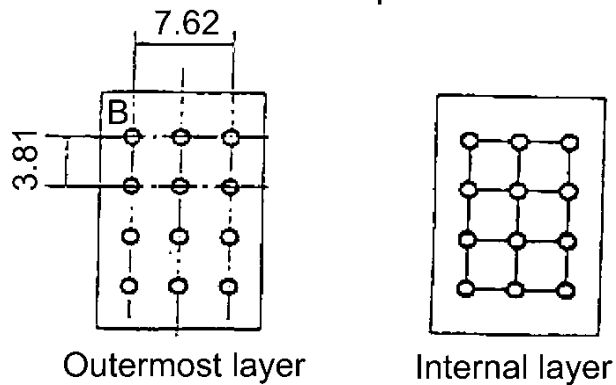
Test Coupons (for Multilayer Printed Wiring Board) (1/3)
